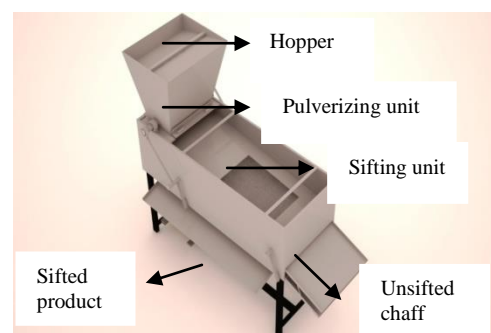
Pictorial view of the dewatered cassava mash lump pulverizer and sifter
